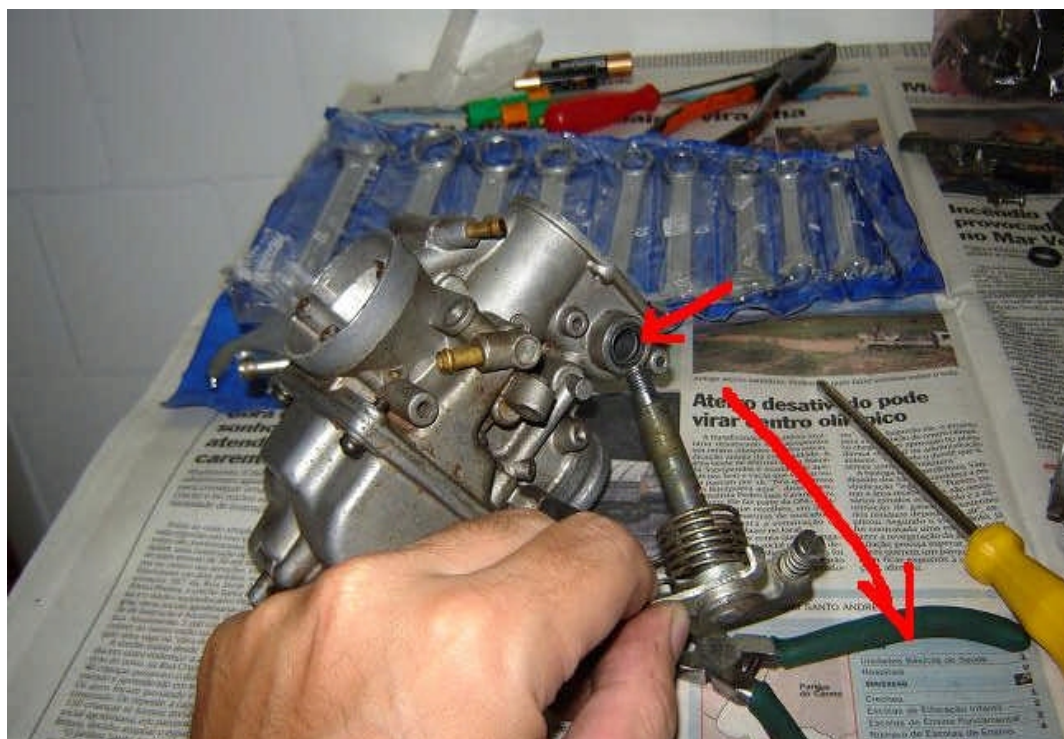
"Et Voila" (he didnt say that that's Mezo being silly)
